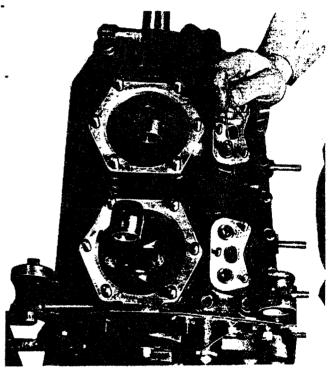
Removal of Hydraulic Unit from Cam Follower Body.
